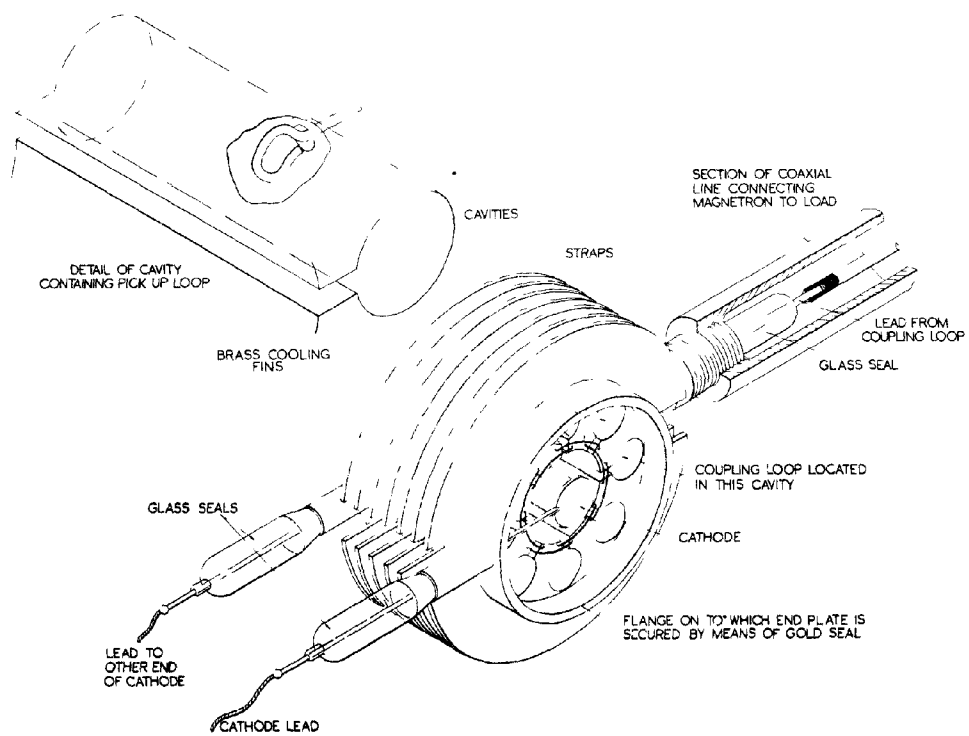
Typical hole and slot type magnetron with end plate removed.
